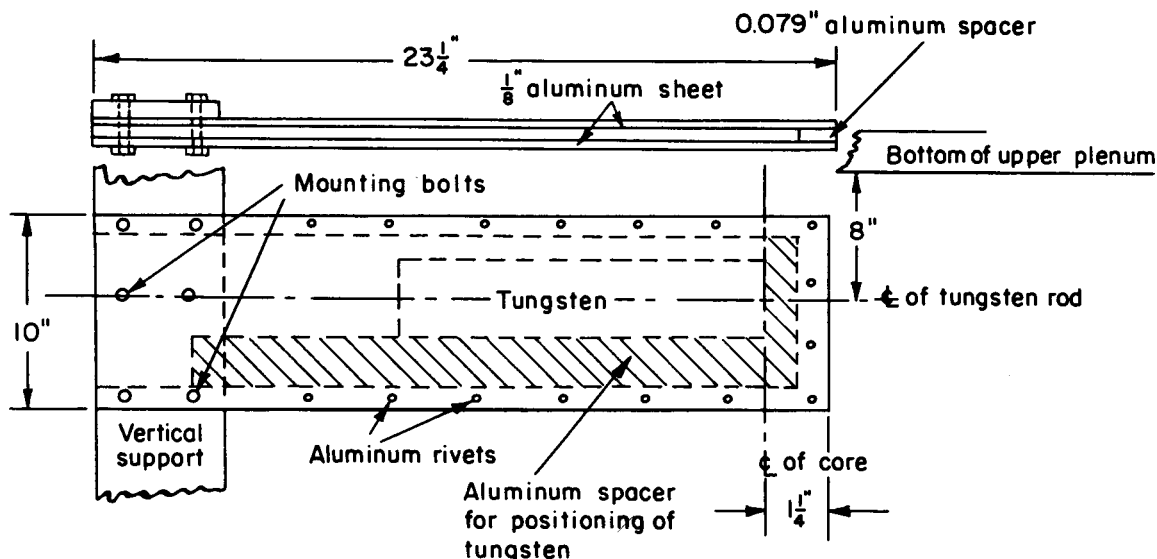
SPECIAL MOCK-UP BLADE HOLDER
